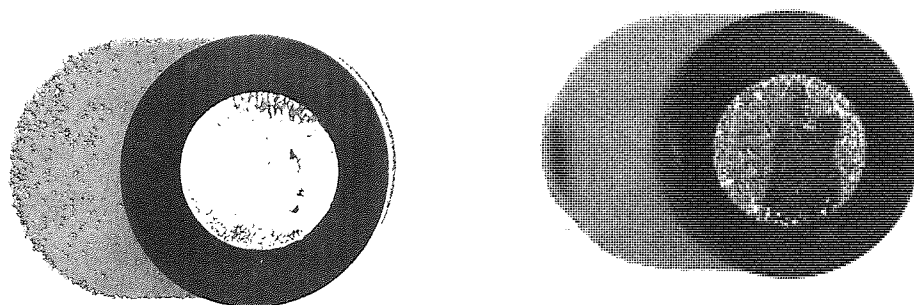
Photograph showing castings from a HMDS/TMCS 'sprayed' mould(right)
